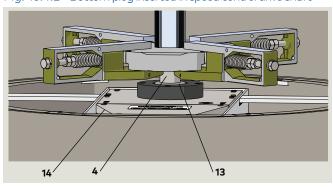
Bottom plug inserted in speed control drive shaft
